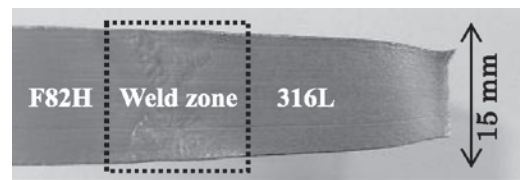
Macroscopic view of weld joint after tensile test at RT.
